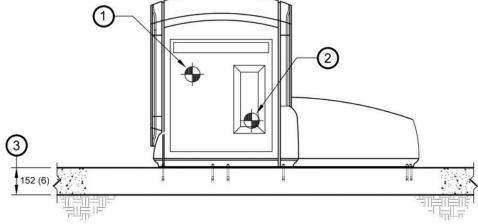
Service Storage Cabinet Dimensions (Optional)
